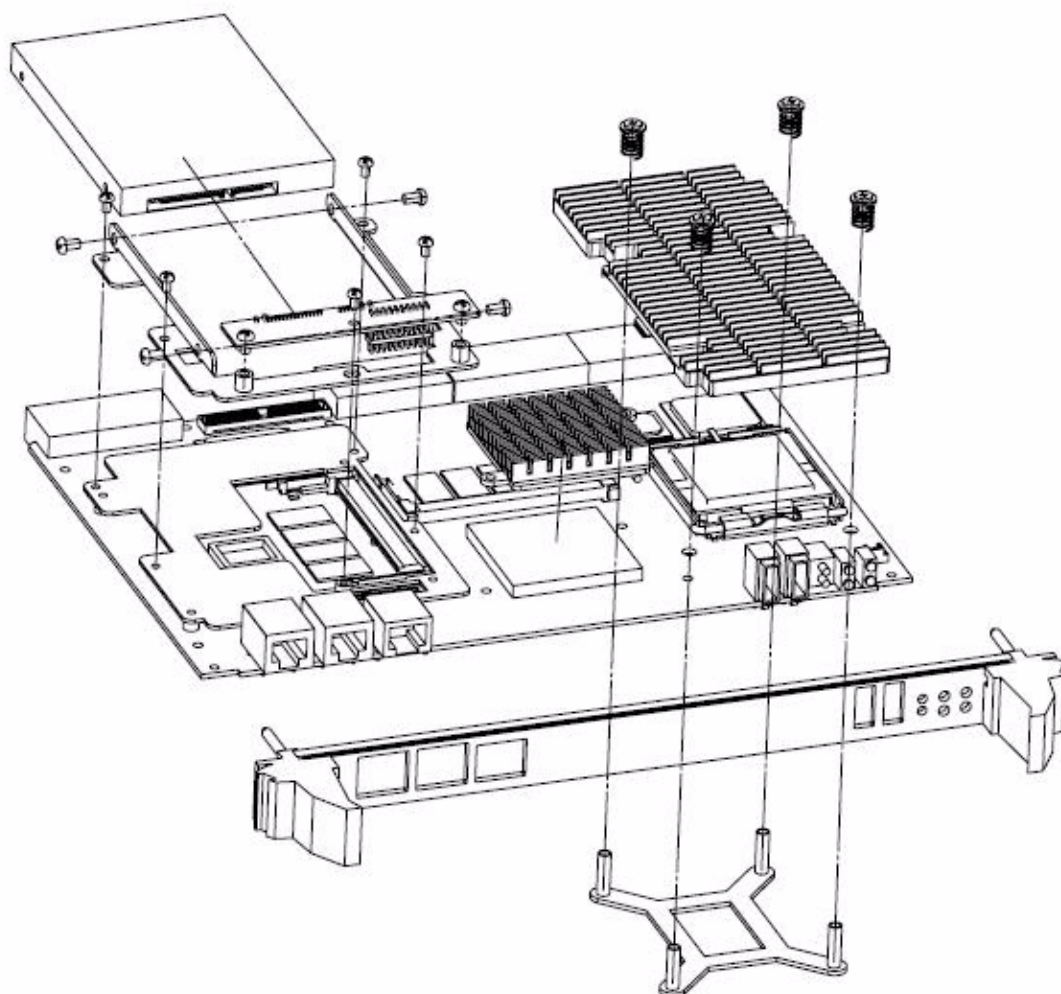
Complete assembly of MIC-3393A with SATA HDD daughter board
